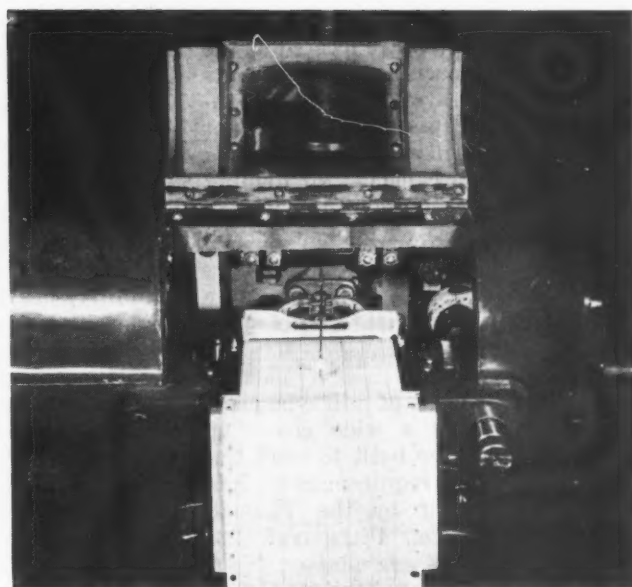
Close-up View of Electrical Recorder for Charting Errors in Lead of Helical Gears and Other Surfaces
